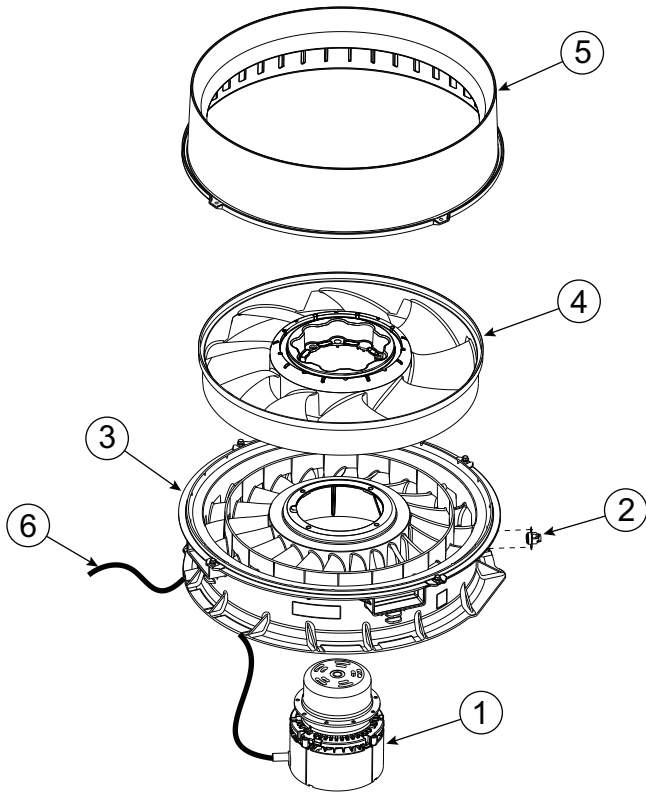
Disassembling High Static Motor and Fan Assembly
